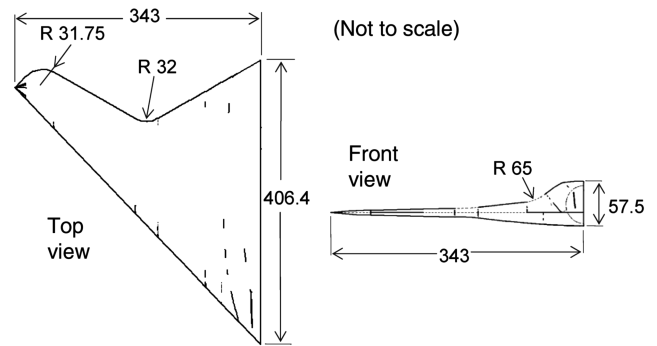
Schematic of the UAV wing tested. Dimensions are in millimeters.
